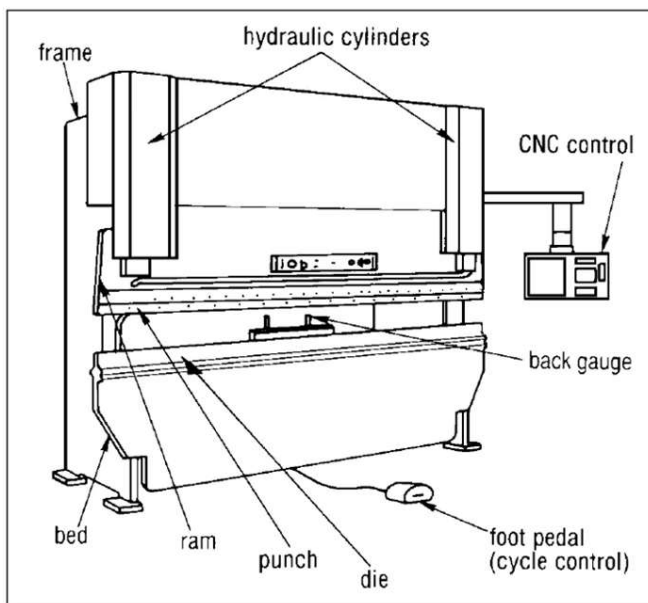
Shows the components of a typical CNC hydraulic press brake. (INLEARN, 2024)
